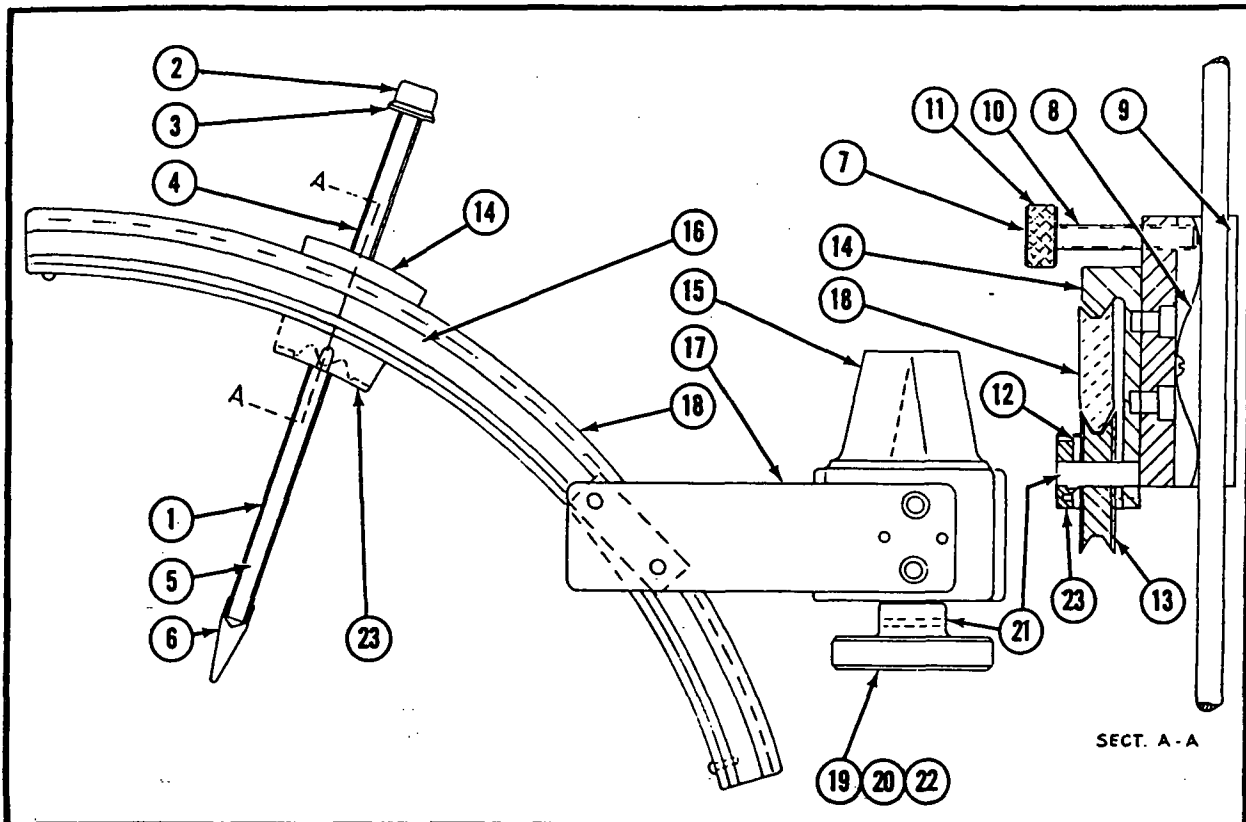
COBALT, BEAM DIRECTING PIN-AND-ARC ASSEMBLY
